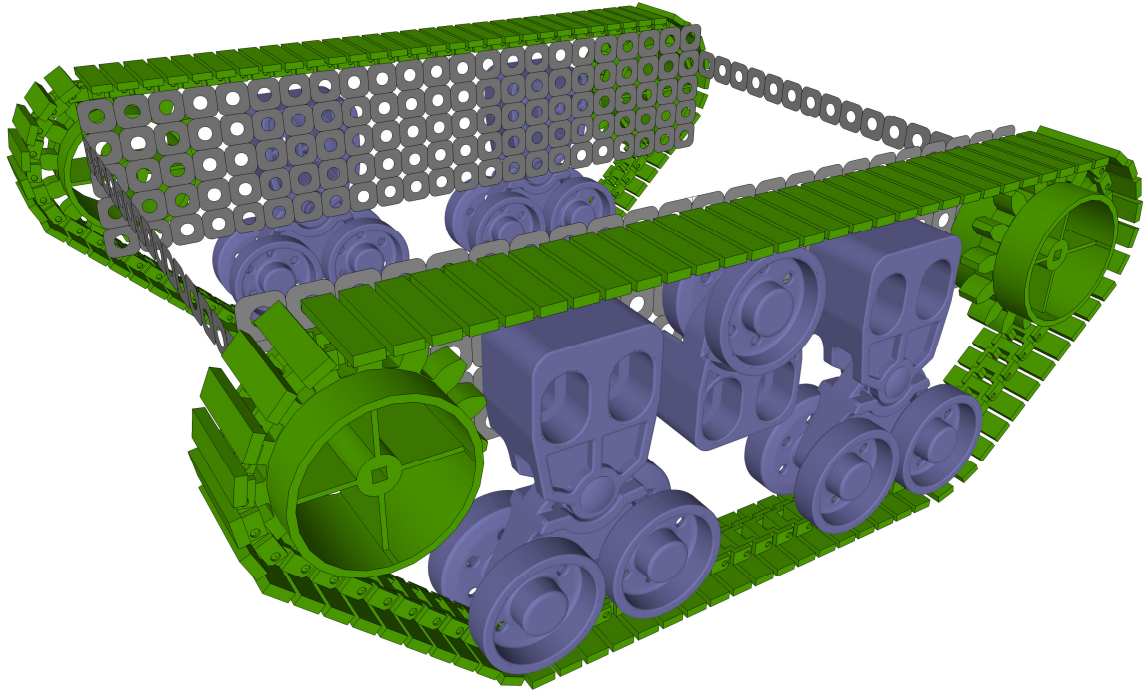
Prototype view of the completed VEX tank tread system and chassis
